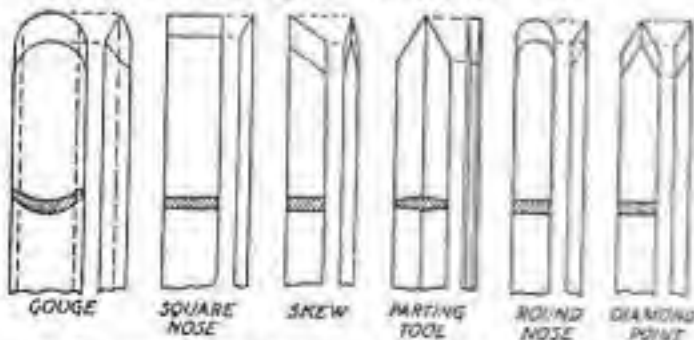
A set of turning tools for the beginner. They must be supplemented by calipers, dividers, rule, oilstone, and slip stone.
